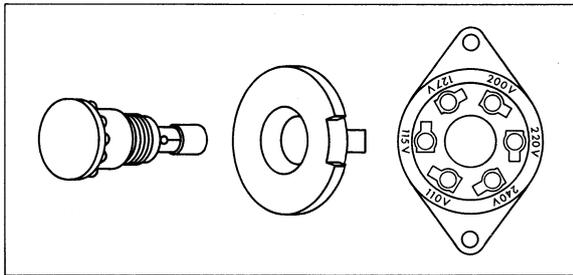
View of the disassembled Fuse Holder and Voltage Selector.
